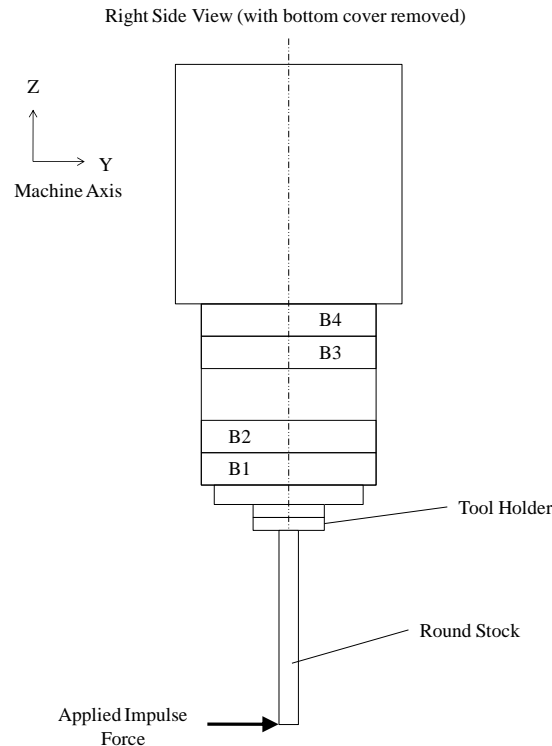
Diagram explaining how Brinelling of the bearings will be performed.
